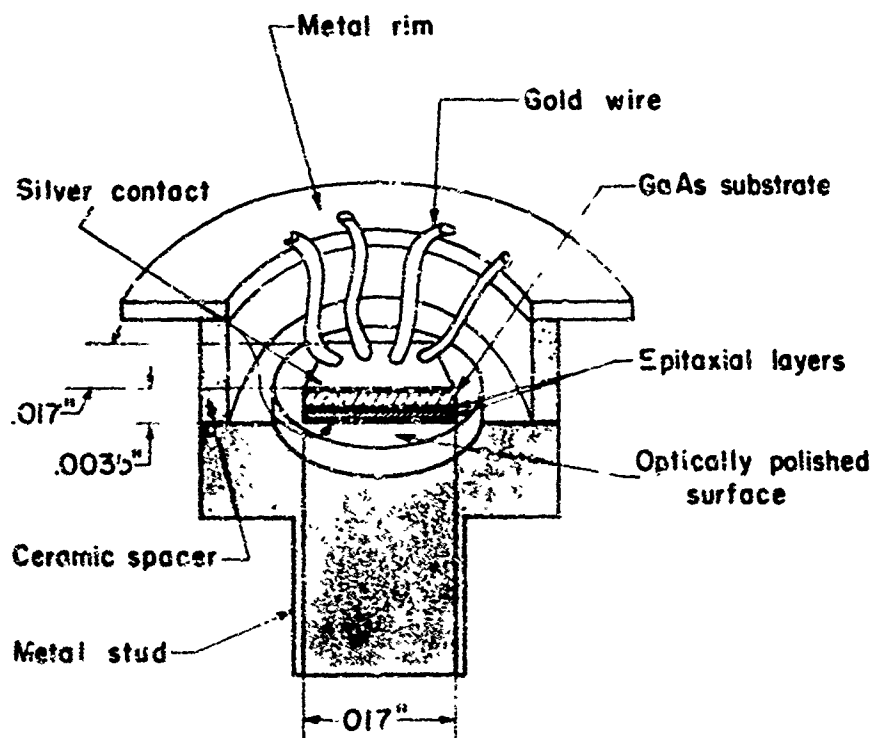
Schematic drawing of a typical transferred electron device mounted in a metal-ceramic package. Devices of the type shown in the drawing can produce power outputs of the order of 1 watt cw at C- and X-band frequencies. (Courtesy Dr. S. Y. Narayan and B. S. Perlman, RCA Electronic Components, Princeton, New Jersey.)
